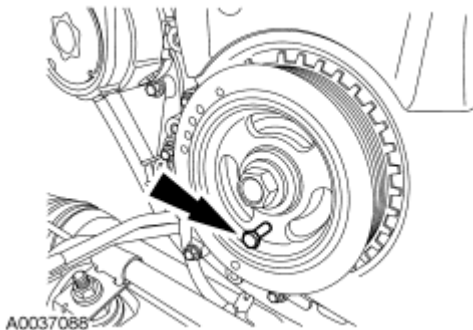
Installing Bolt Through Crankshaft Pulley And Thread It Into Front Cover
